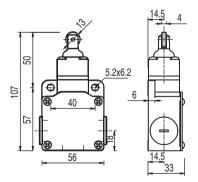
Dimensions of S300-M0C3-M20-15 and S300-M13C3-M20-15 in mm
